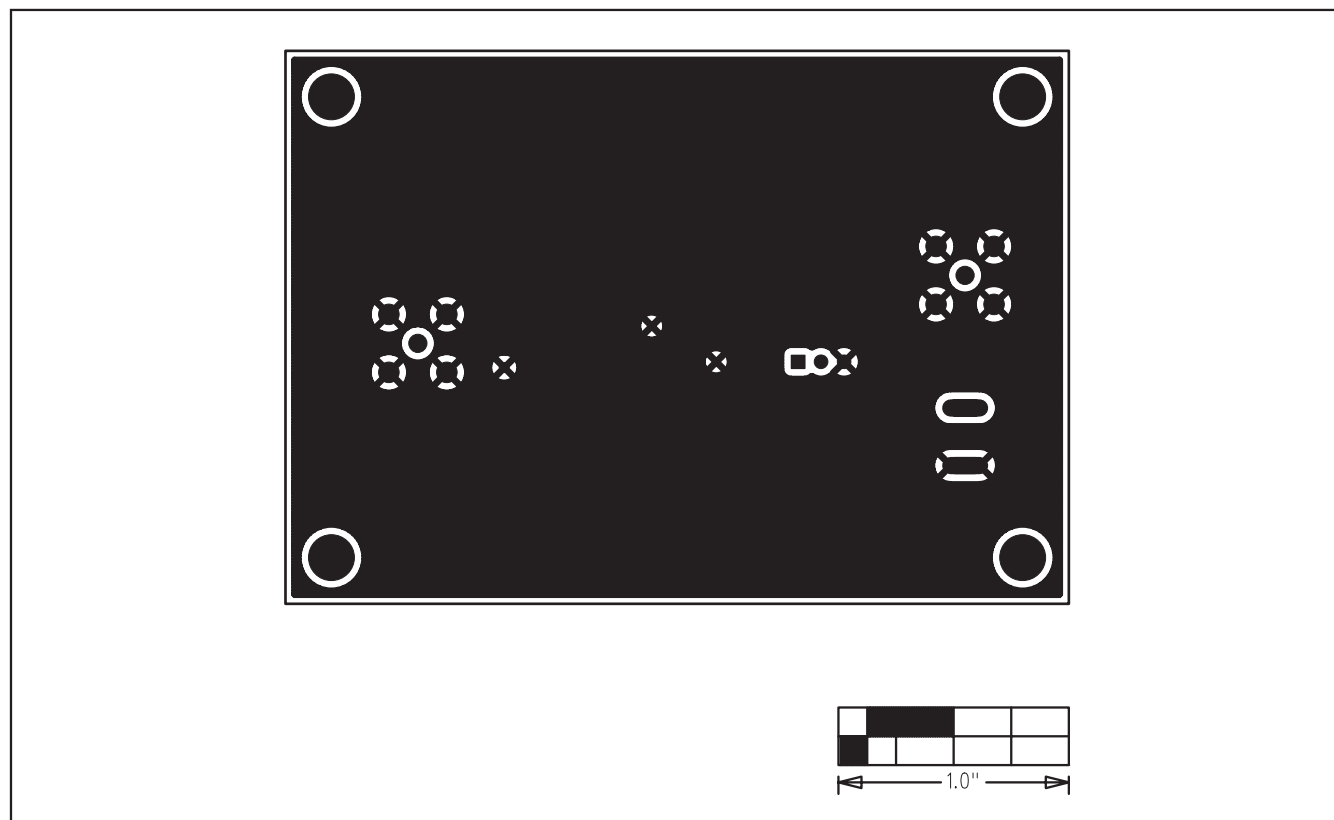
MAX4090 EV Kit PCB Layout—Solder Side
